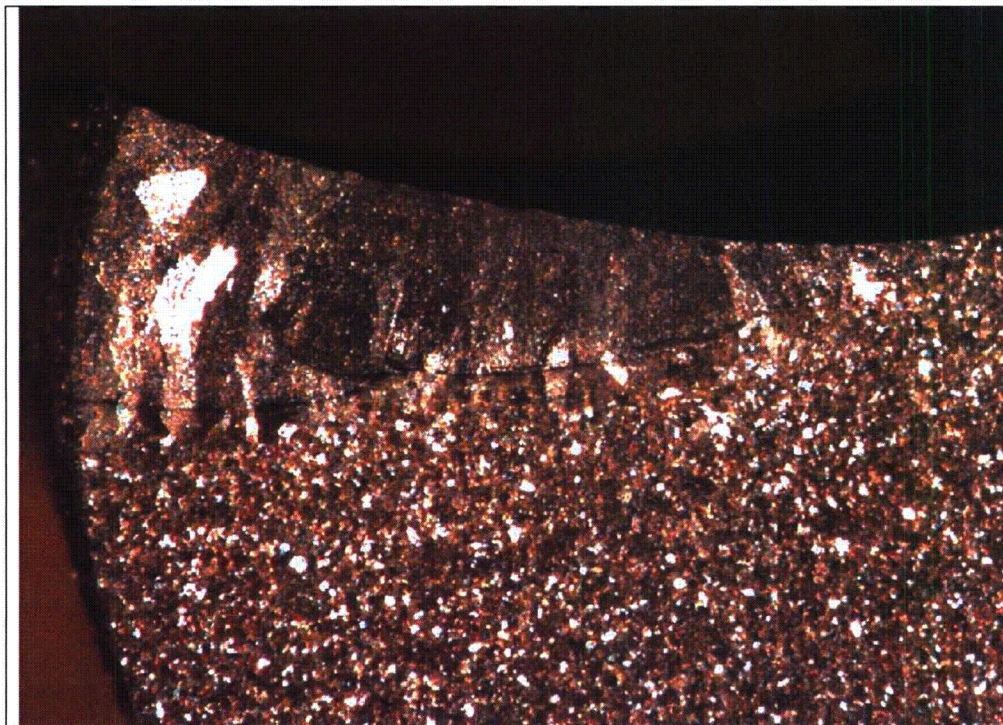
A closer look at the macro-etched weld. The boat sample contained portions of the last two weld passes. (15.2x Magnification)
